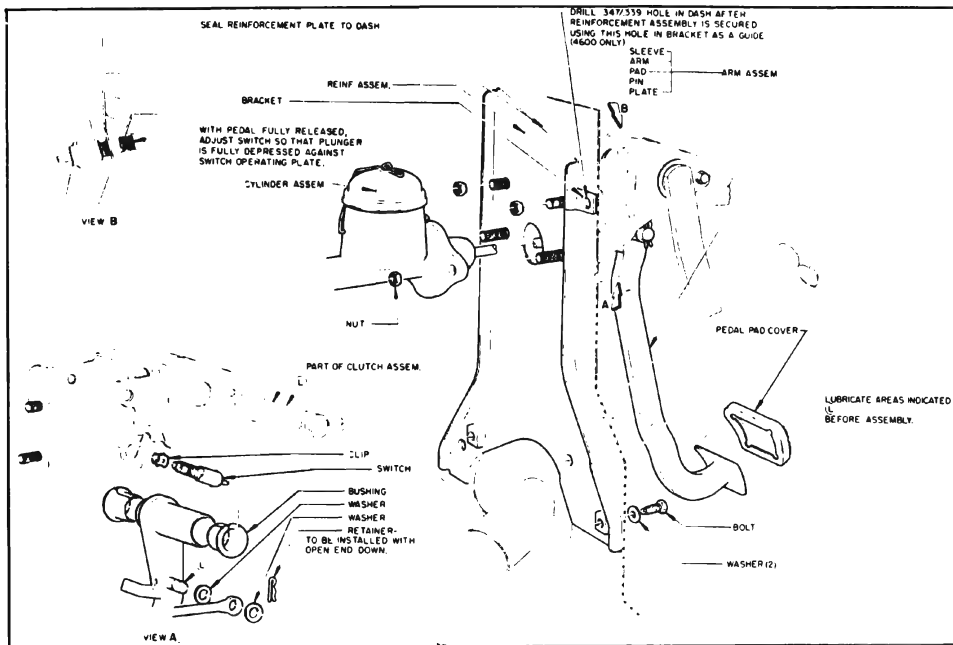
Standard Brake Pedal and Master Cylinder Installation (Synchromesh)
